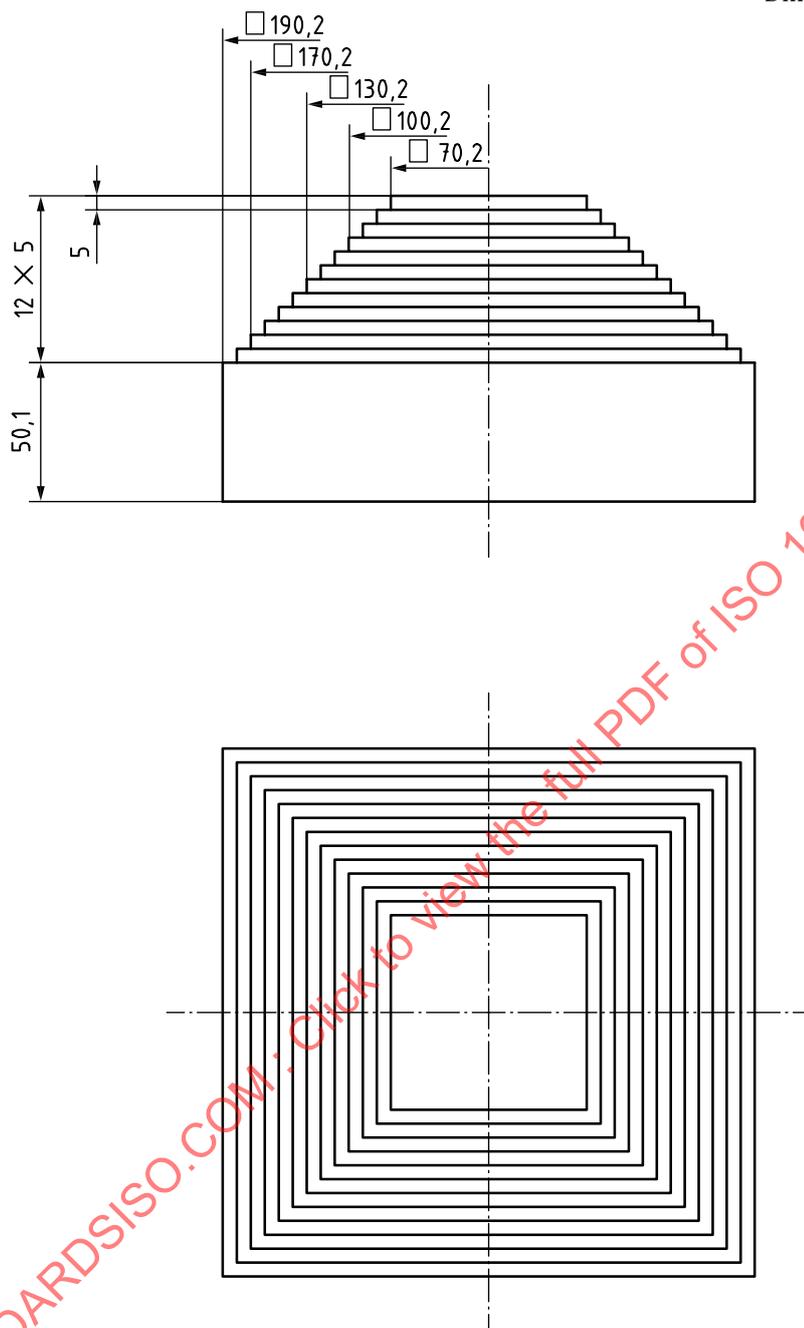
The shape and dimensions of the part blank, leaving a finishing allowance
